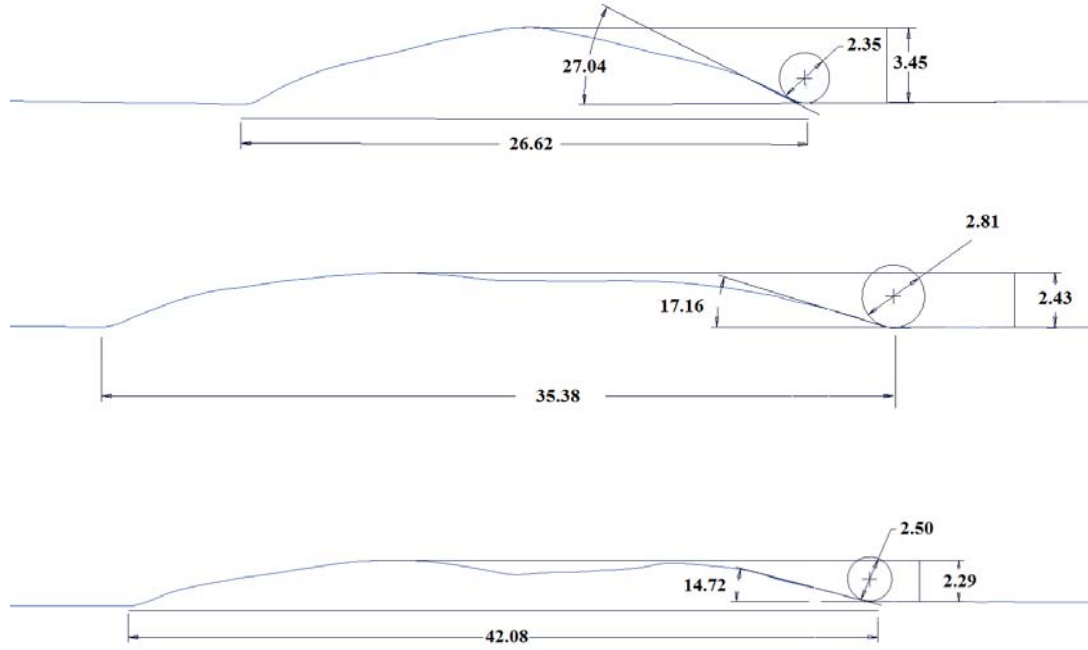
Schematic illustration of the weld profiles and weld parameter measurements for the 20 mm, 30 mm and 40 mm thick specimens
